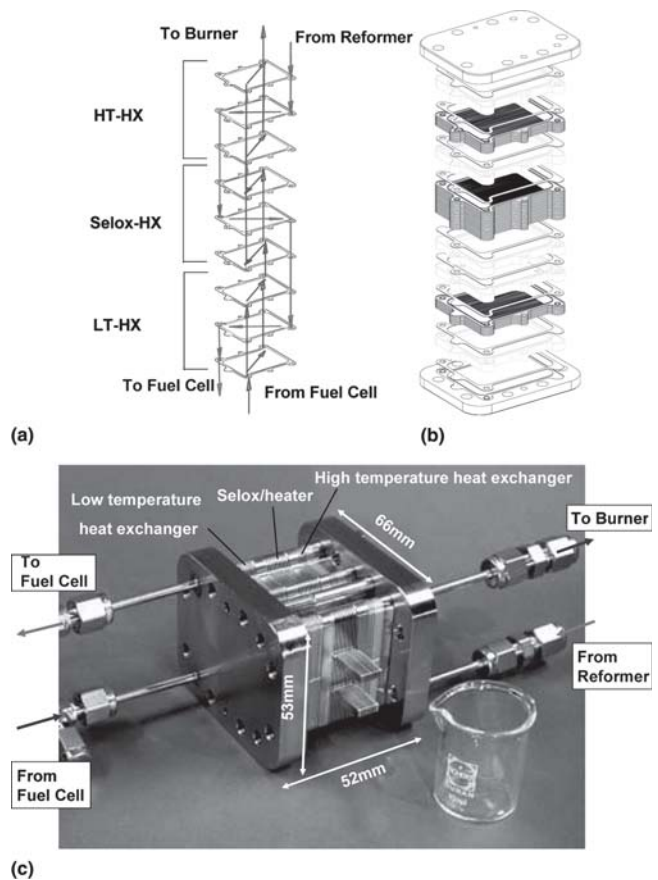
Testing reactor designed for the selective oxidation of CO: (a) flow paths; (b) explosion view; (c) mounted device
